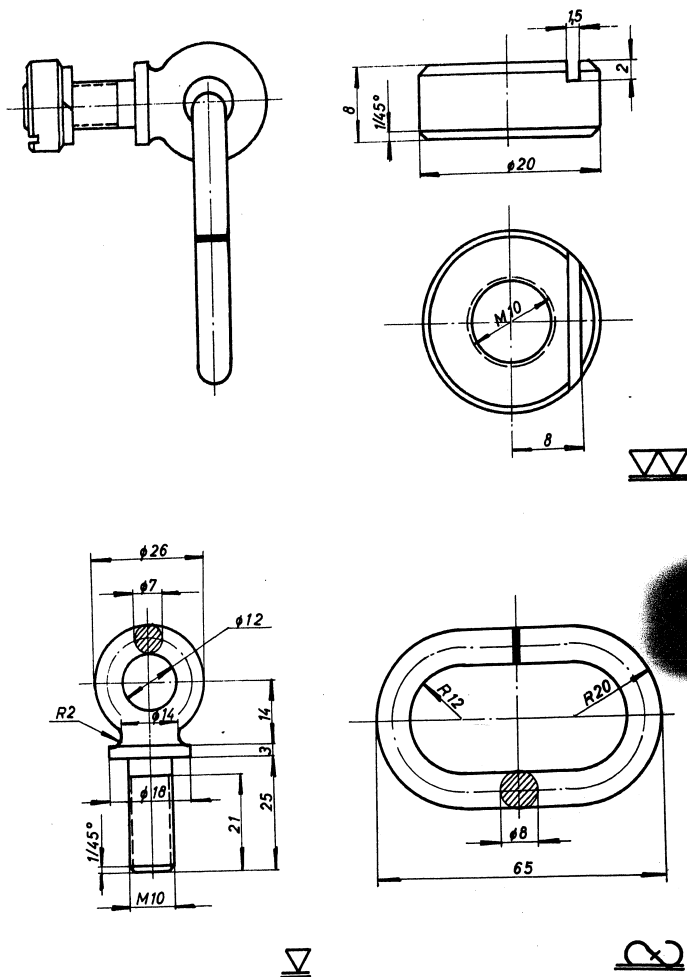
PACK LOADING LINK — ASSEMBLY
